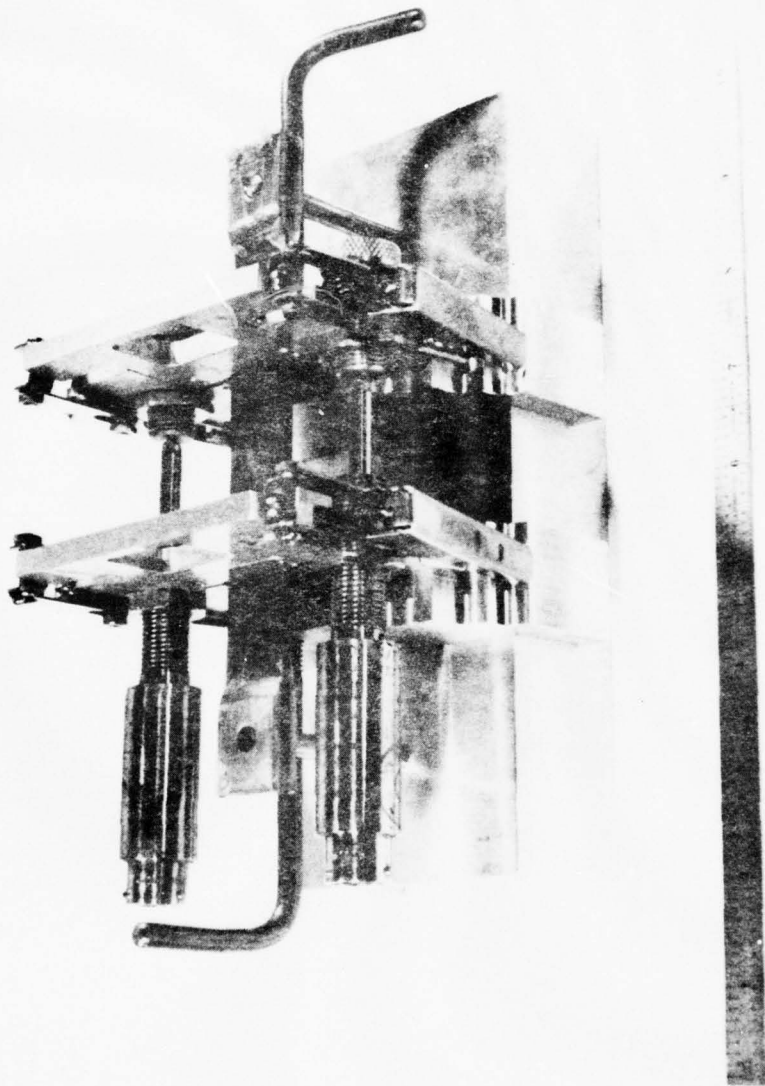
EXTENSOMETER AND SPECIMEN ASSEMBLY JIG.
